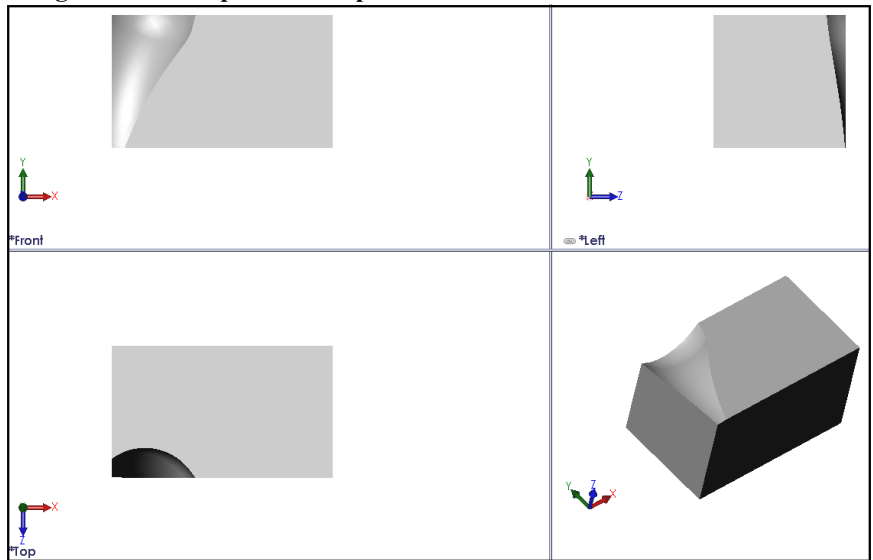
Output for tool path in Annexure 2 for ball end mill cutter.
